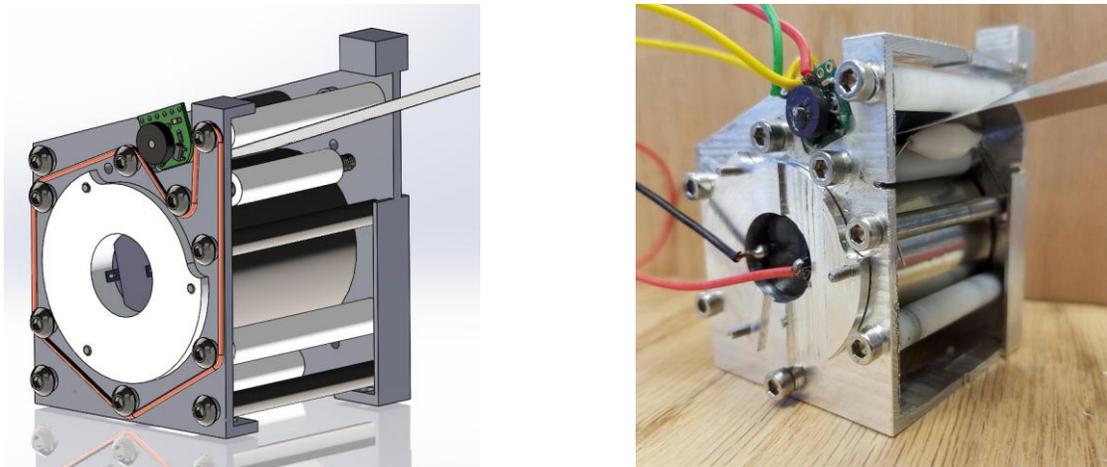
Design of deployer in SolidWorks (left) and manufactured and assembled deployer (right).
